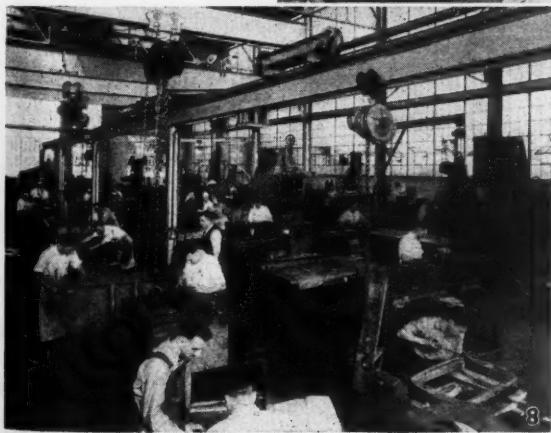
These B & S vertical milling machines are used on the smaller work. Figs. 7 and 8—Views of the die assembly floor. Note the complete crane equipment, which reduces handling time and keeps costs at a minimum.
